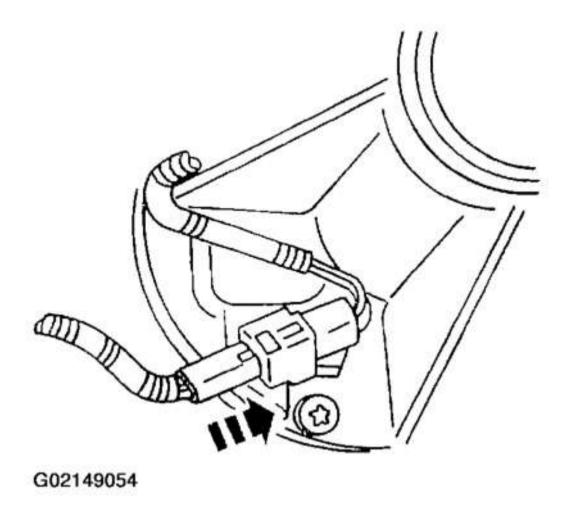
Connecting Transfer Case Coil Electrical Connector
